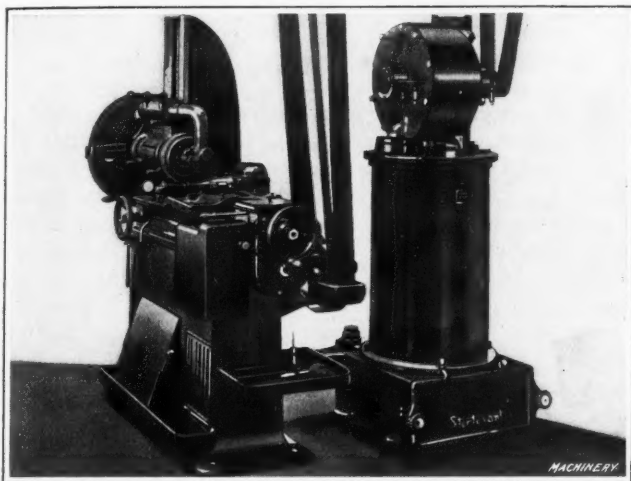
Automatic Gear-cutting Machine with Exhaust System to carry away Chips and Dust
